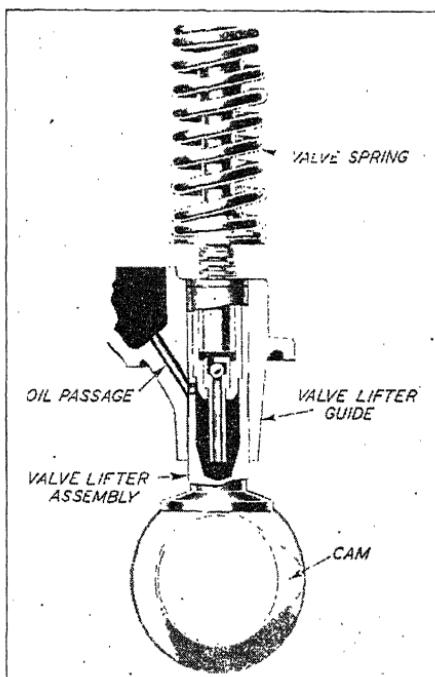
Lincoln Hydraulic Valve Lifter Assembly
